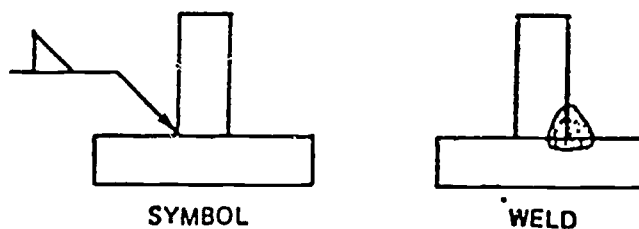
Application of Fillet Weld Symbol - Far Side
